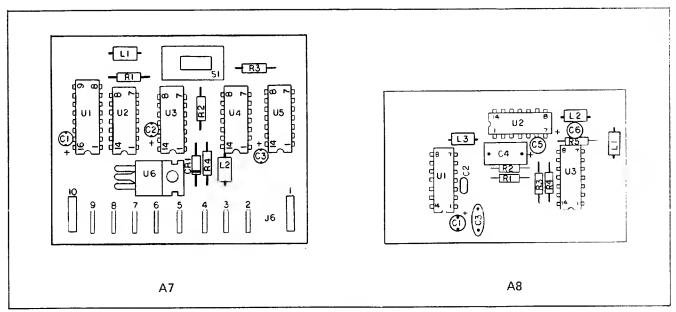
A7 and A8 Multiplier PCB Assembly
